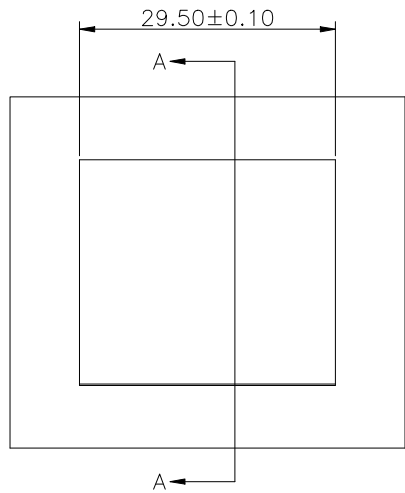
DETAIL LIGHT PIPE LOCATION AND OTHER ZONES
